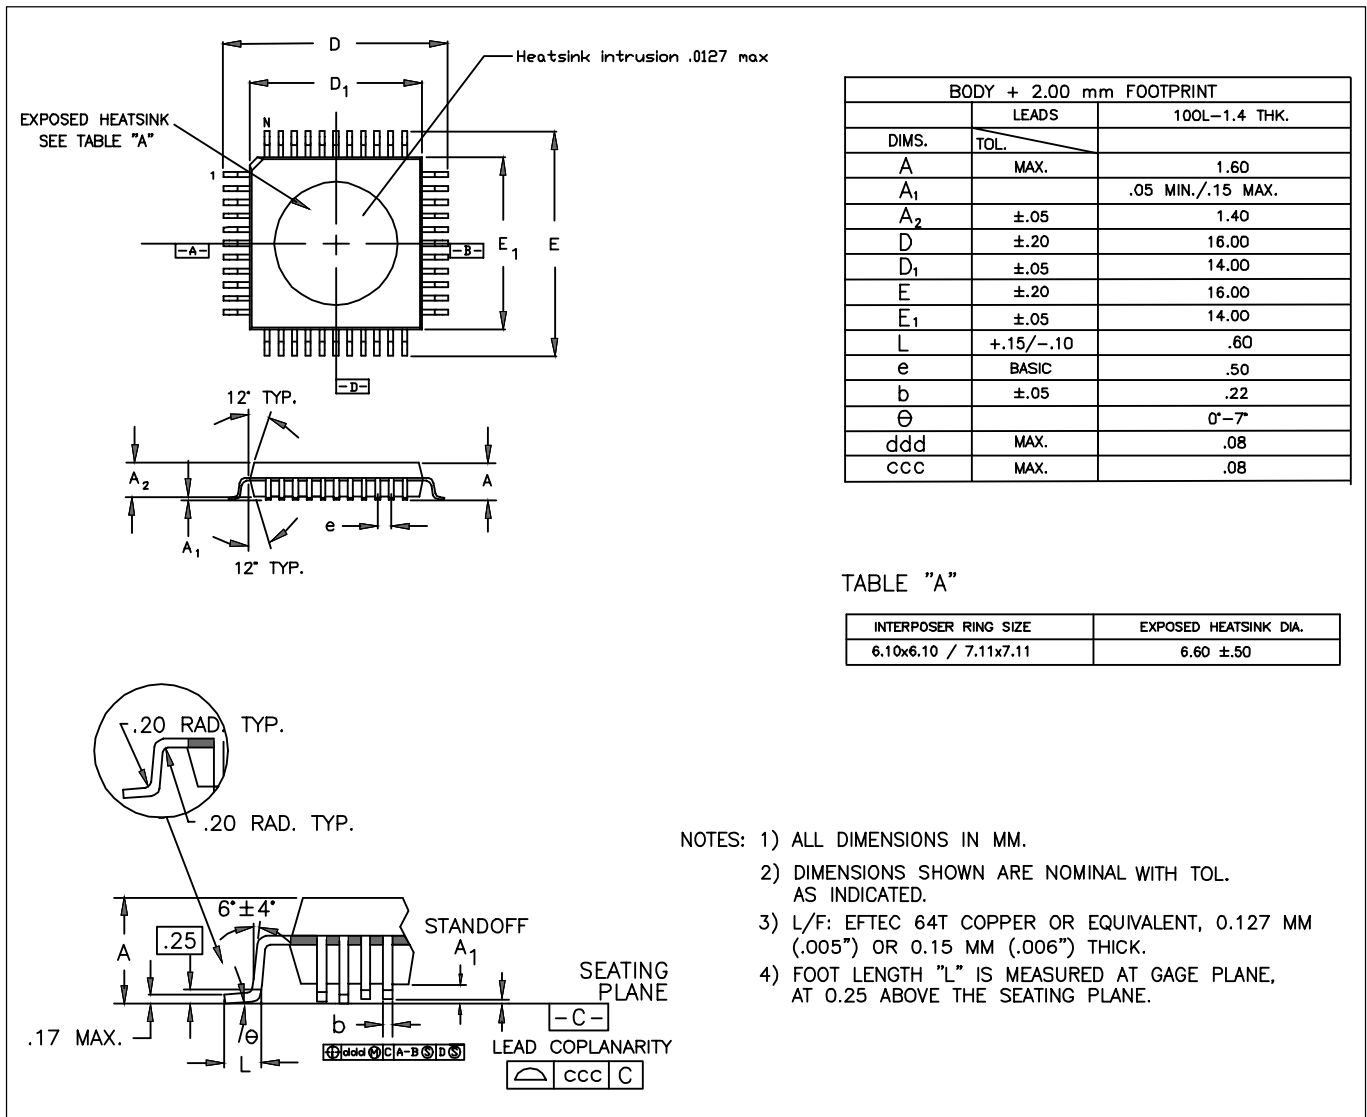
100 pin TQFP. All dimensions are in mm. Exposed heat slug is mounted on bottom of the package.
